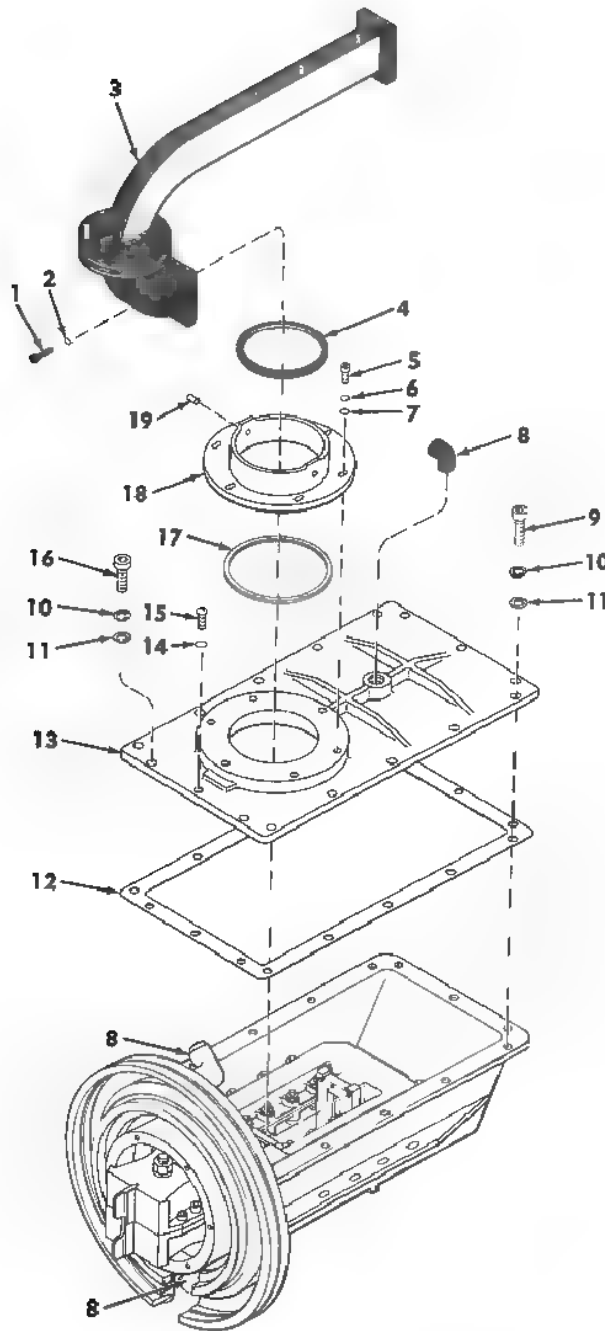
MOUNT, THERMISTOR /8010866/-EXPLODED VIEW
